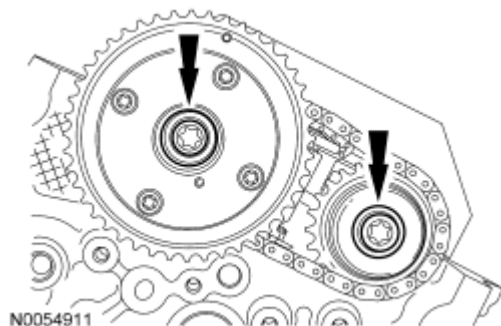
Locating LH VCT Assembly Bolt & LH Exhaust Camshaft Sprocket Bolt
